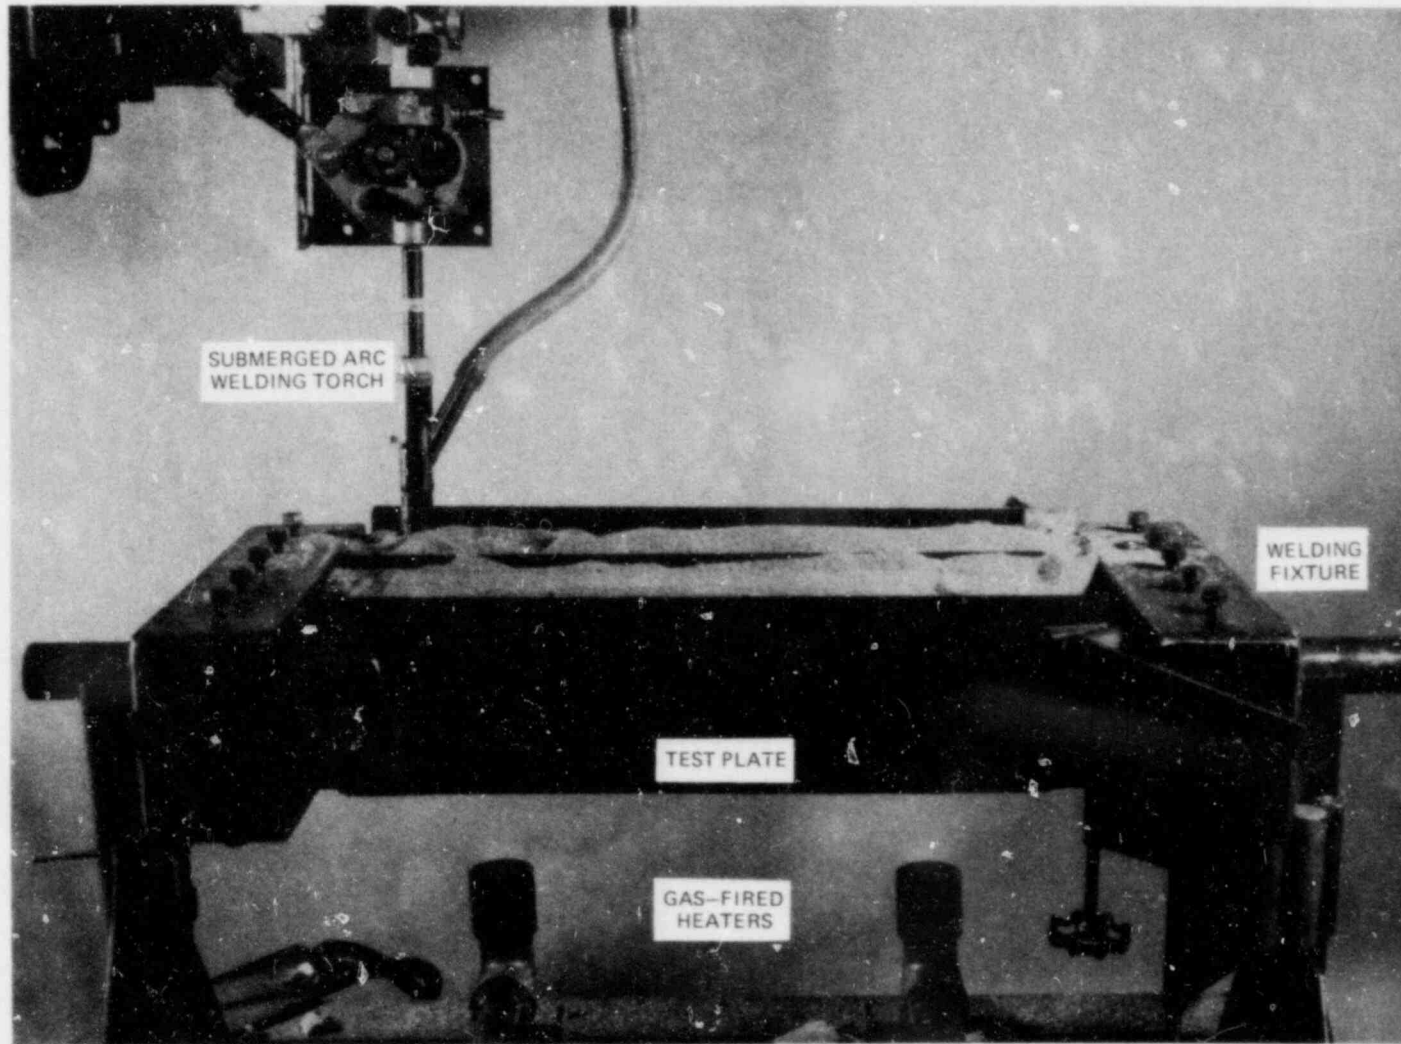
Portable fixture for submerged-arc weld cladding.
